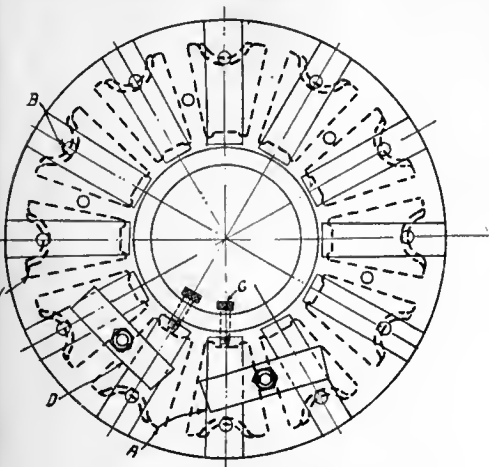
METHOD OF TURNING RADIUS ON PART SHOWN IN FIG. 9.
